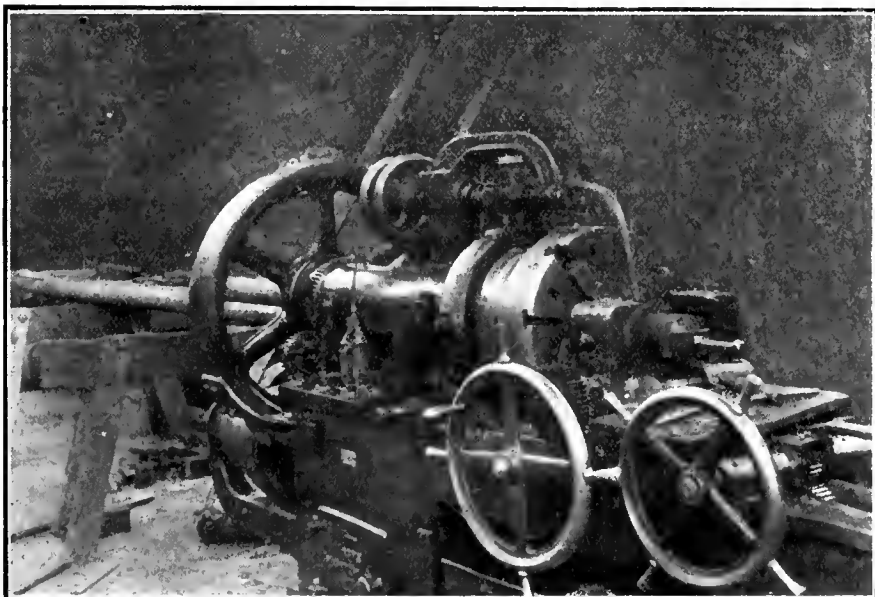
CUTTING BILLETS FROM BAR STOCK ON AN "AEME" CUTTING-OFF MACHINE.
